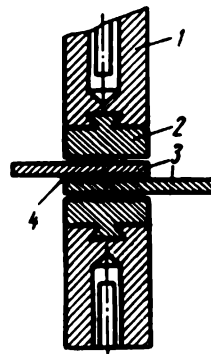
Position of solder and parts to be soldered in resistance heating by means of carbon lamellae fixed to the electrodes of a spot-welding unit: 1-electrode; 2-carbon insertions; 3-the parts to be soldered; 4-solder.
